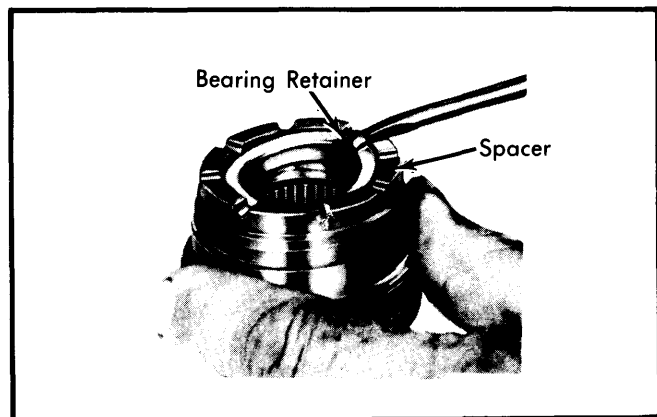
Removing Upper Thrust Bearing Retainer (Large Gear Shown)
